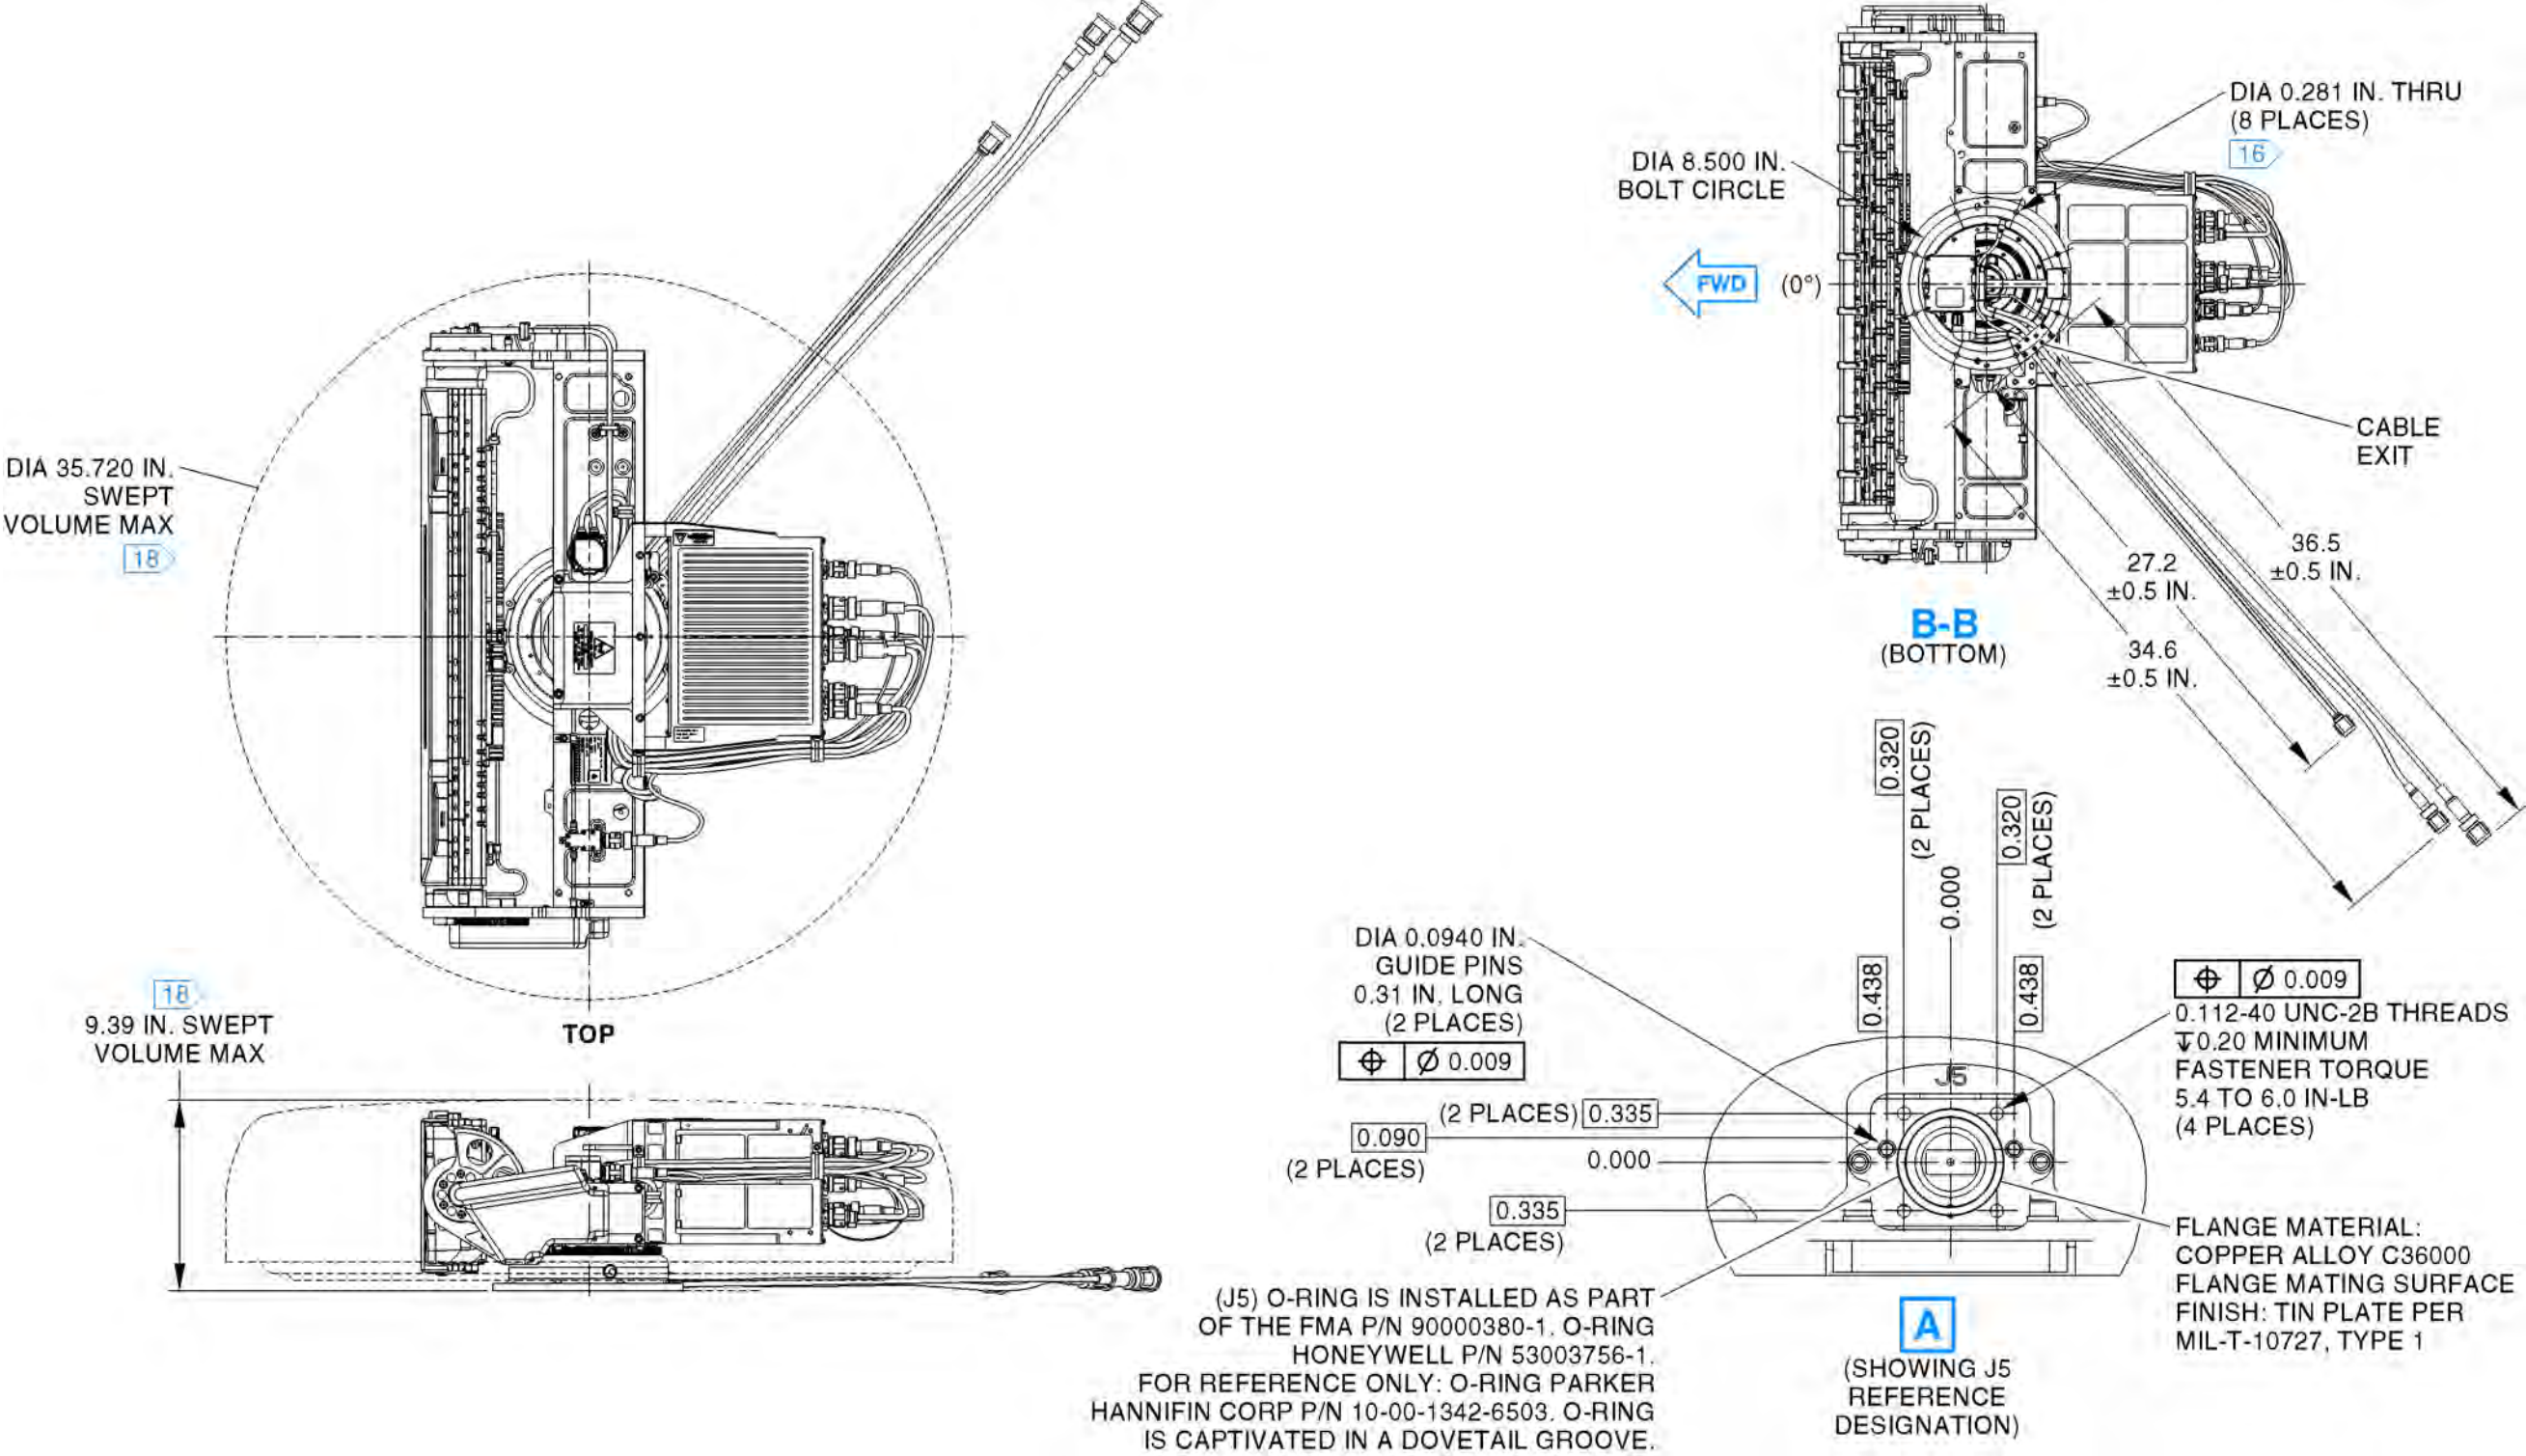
FMA Outline and Installation Drawing (Sheet 4 of 12)
